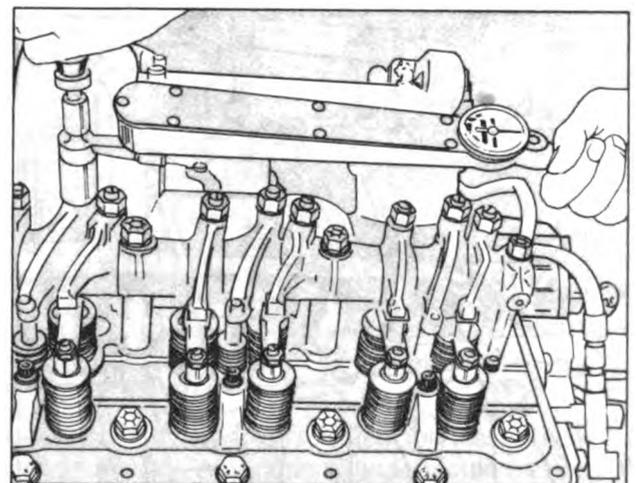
(OM1038L). Tighten injector adjusting screw locknut
